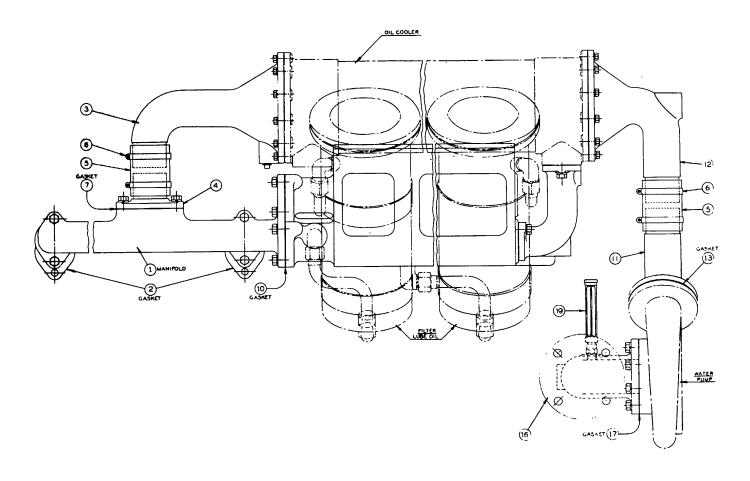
A4037 DO NOT ORDER PARTS BY REFER NUMBERS.
